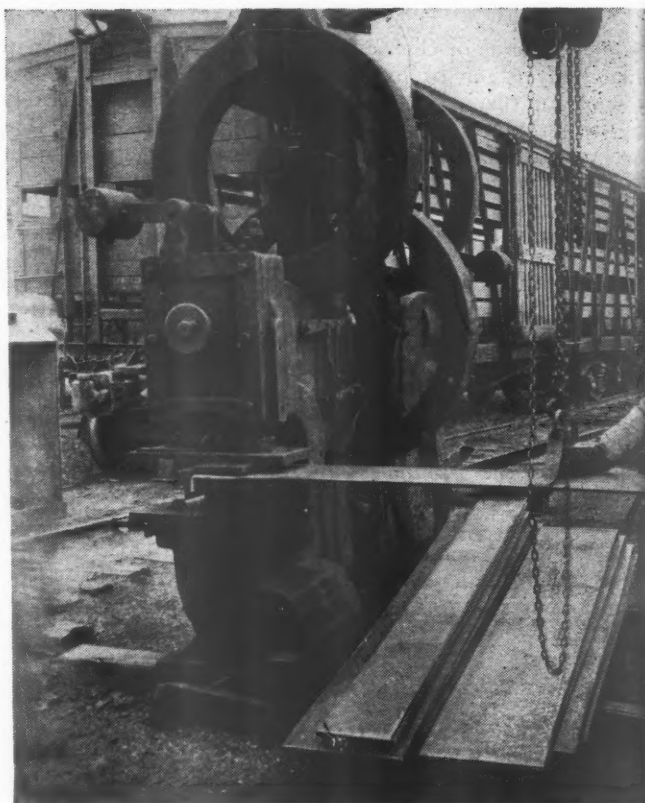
Old sheet-metal punch converted into press for flanging and offsetting bolster cover plates
